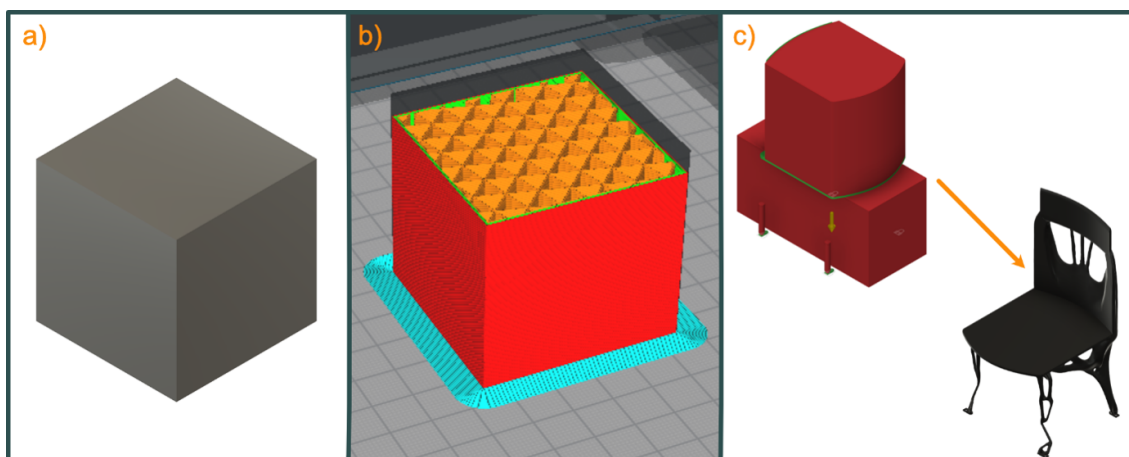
Virtual prototyping method examples. a) CAD geometric representation of a cube. b) simulation of manufacturing tool paths for a 3D printed cube. c) generative design set-up and output for a chair design.
